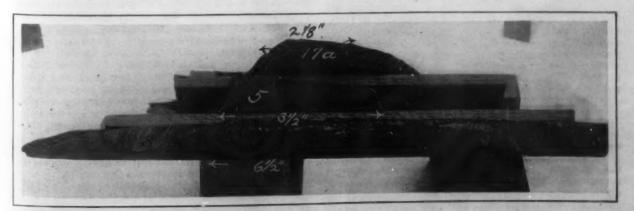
Appearance of Fractured Surface of Flange 8, and Two Others. Each fractured surface displayed one or more laminated seams
